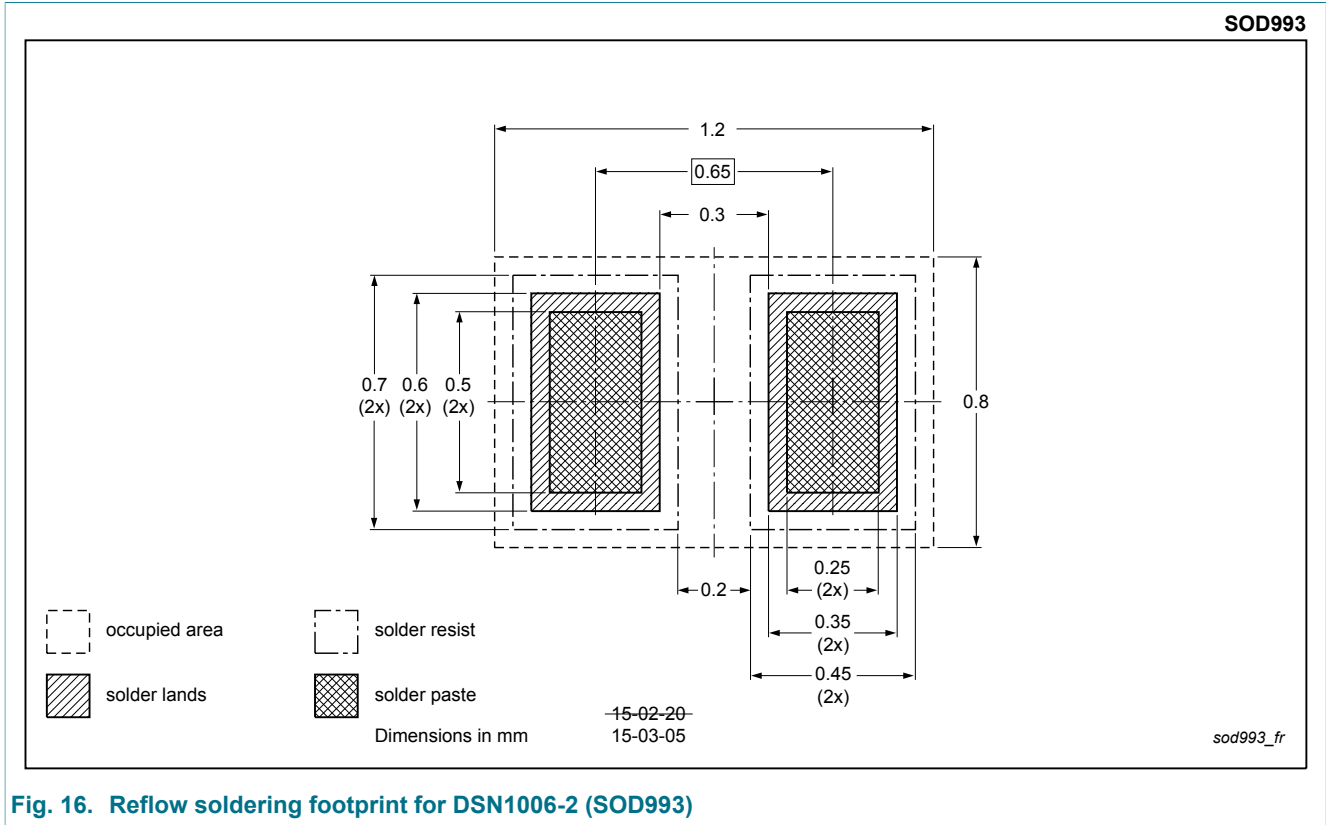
Reflow soldering footprint for DSN1006-2 (SOD993)
